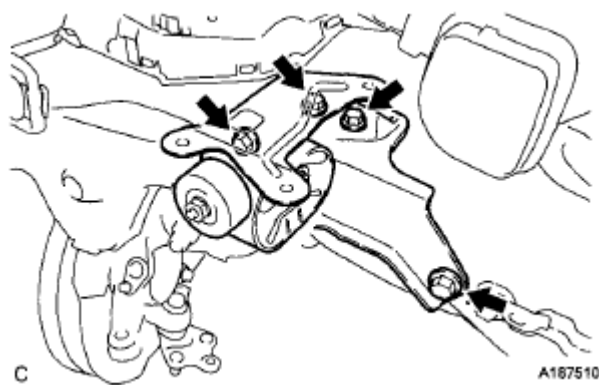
Locating Bolts And Engine Mounting Insulator LH
